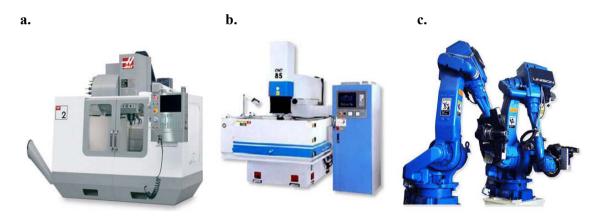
Production Machines Based on CNC Technology [32, 33, 34]
